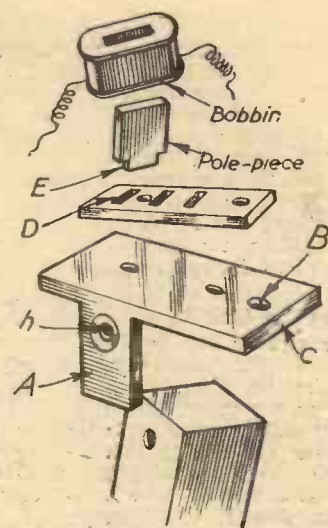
An alternative method of constructing the sets of three pole-pieces.
